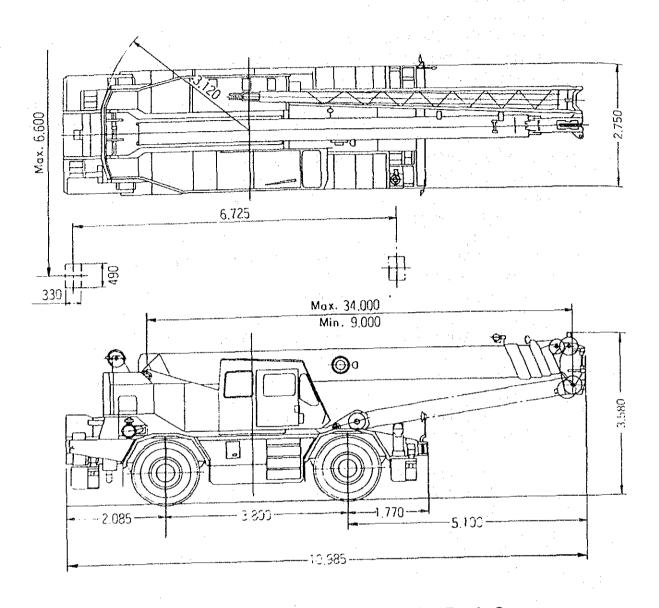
Typical Arrangement of 35 Ton Truck Crane
